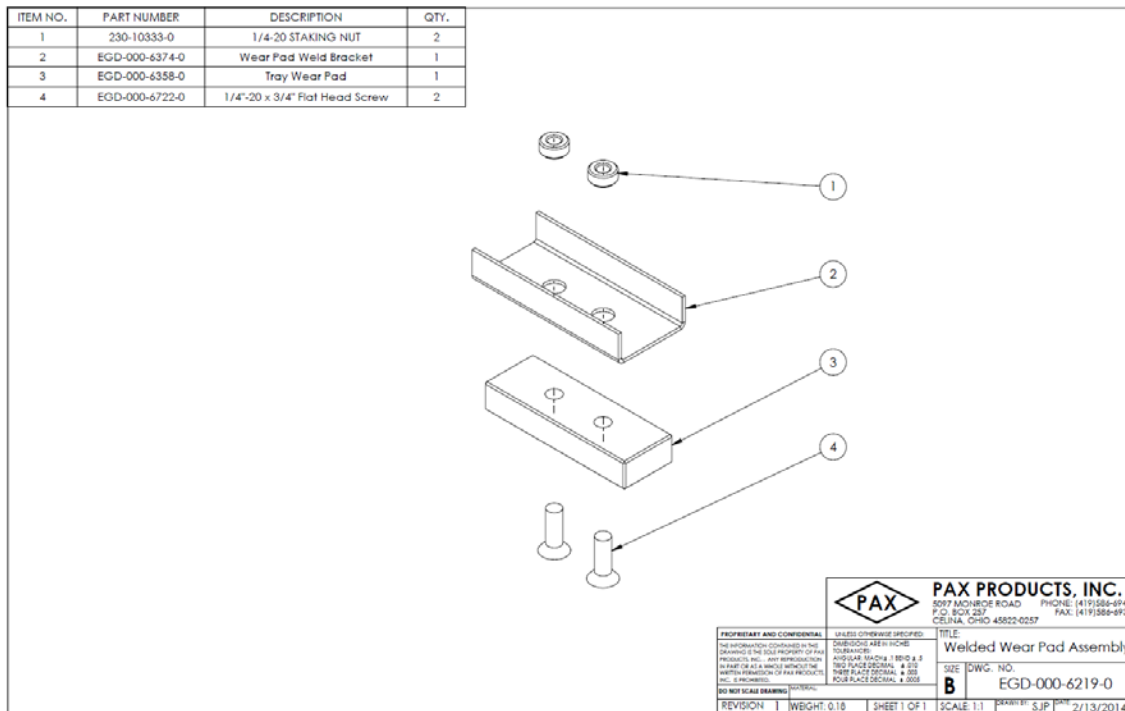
EGD-000-6219-0 WELDED WEAR PAD ASSEMBLY
